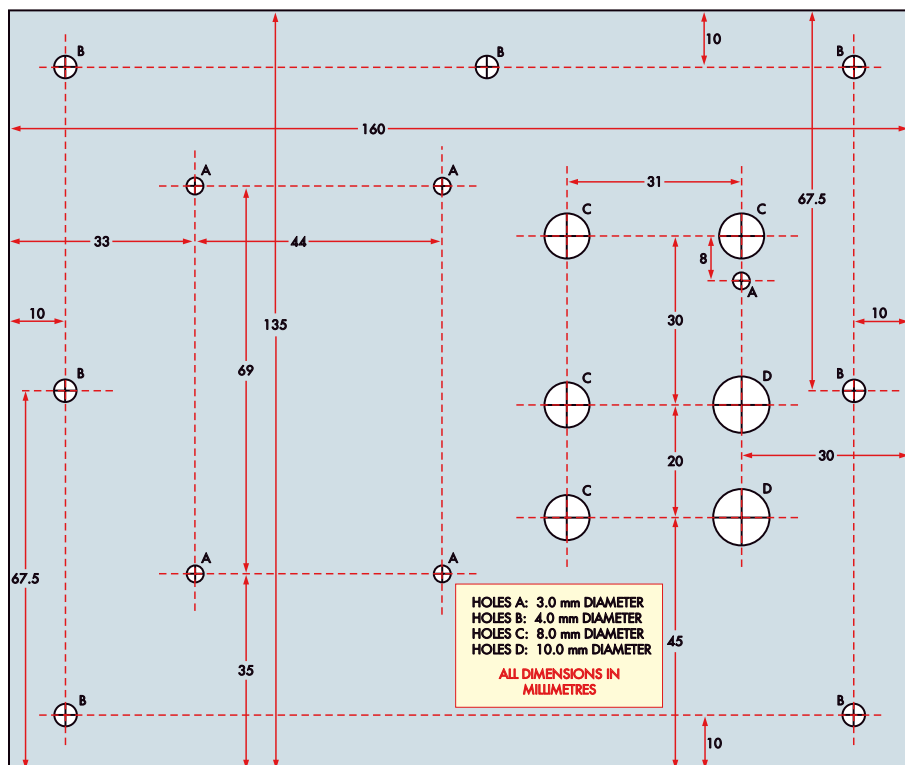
the monitor amplifier, terminals and volume control mount on this 1.5mm-thick aluminium plate. Once you've cut it to size, mark out and centre-punch the hole positions and drill pilot holes, then enlarge them to the sizes shown and deburr.
